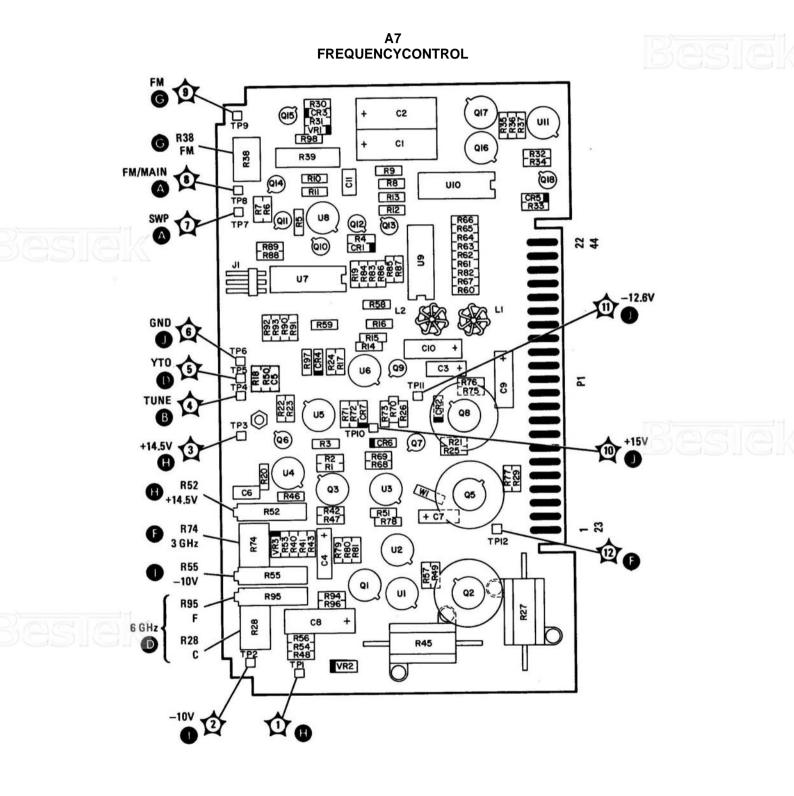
FREQUENCY CONTROL ASSEMBLY A7, COMPONENT LOCATIONS (SERIAL PREFIX 2236A)
